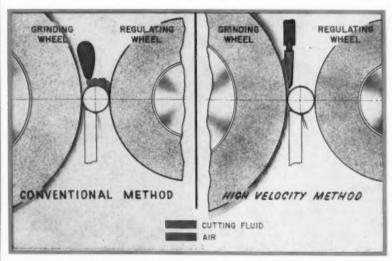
This grinding fluid nozzle forces coolant through an air stream and the cutting fluid acts as both a coolant and a friction reducing agent.
